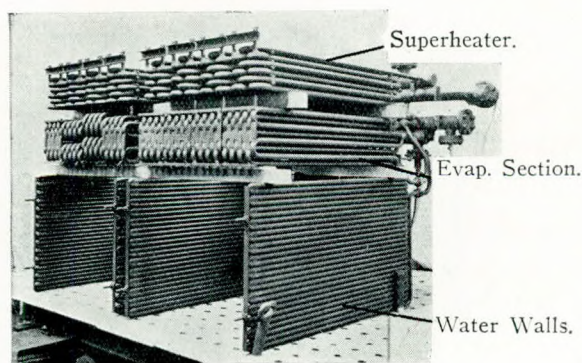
Assembly of tubular parts of boiler shown in Fig. 6.
